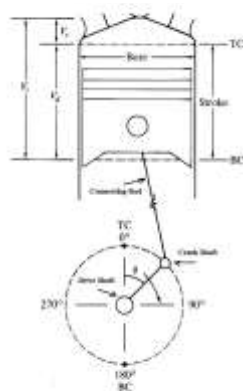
Dimensions of a Typical Cylinder in Spark-Ignition Engines
